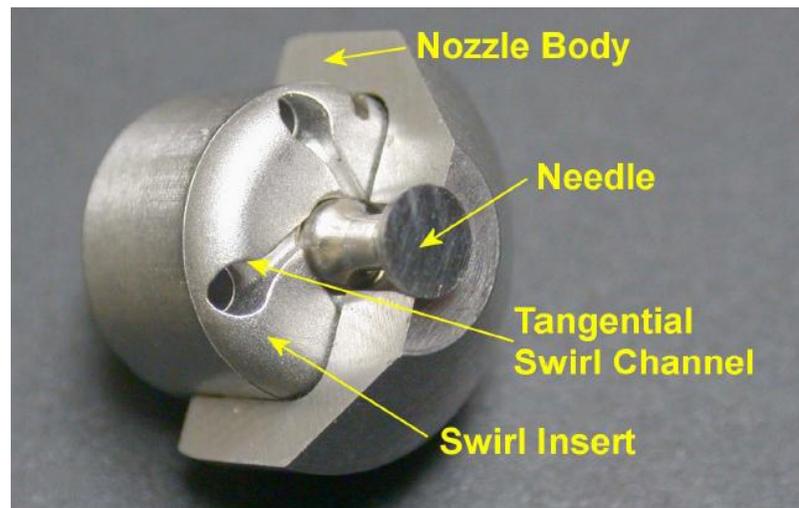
Outwardly opening high swirl nozzle used in the E-TEC injectors [3].
